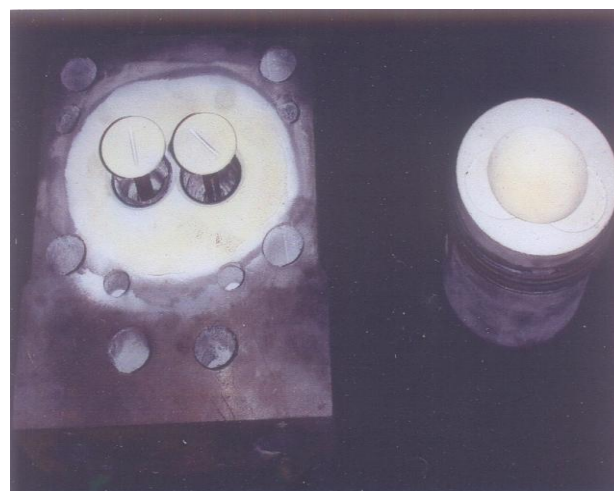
Photographic view of ZrO_2 and Al_2O_3 coated components
